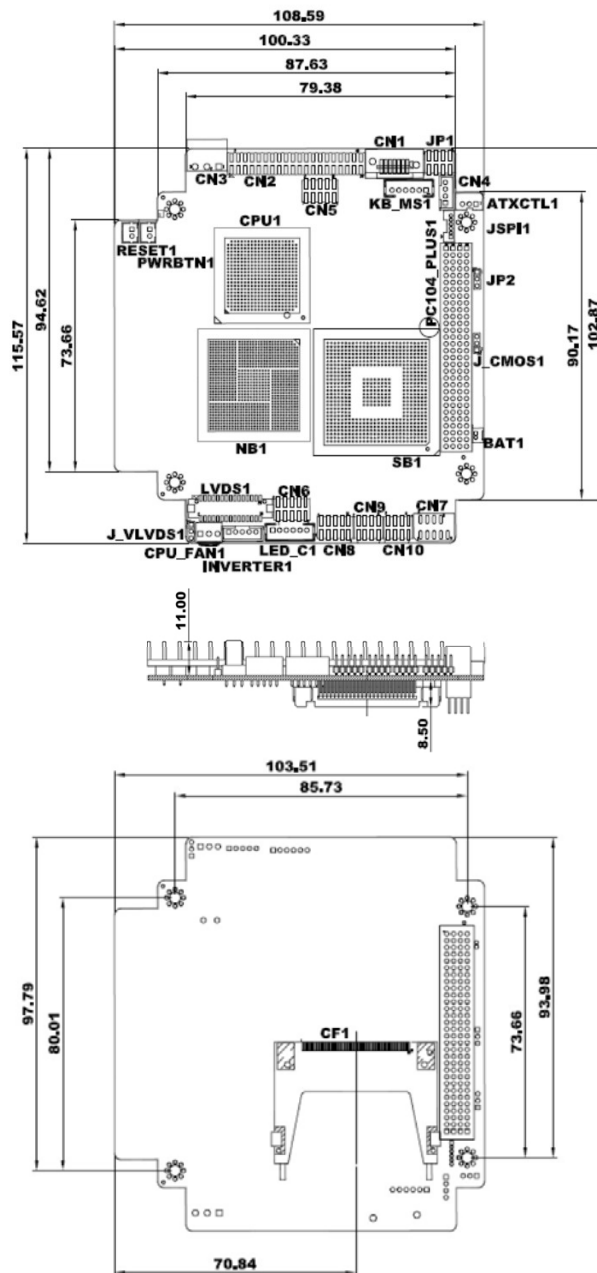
PM-945GSE-N270 Dimensions (mm)
